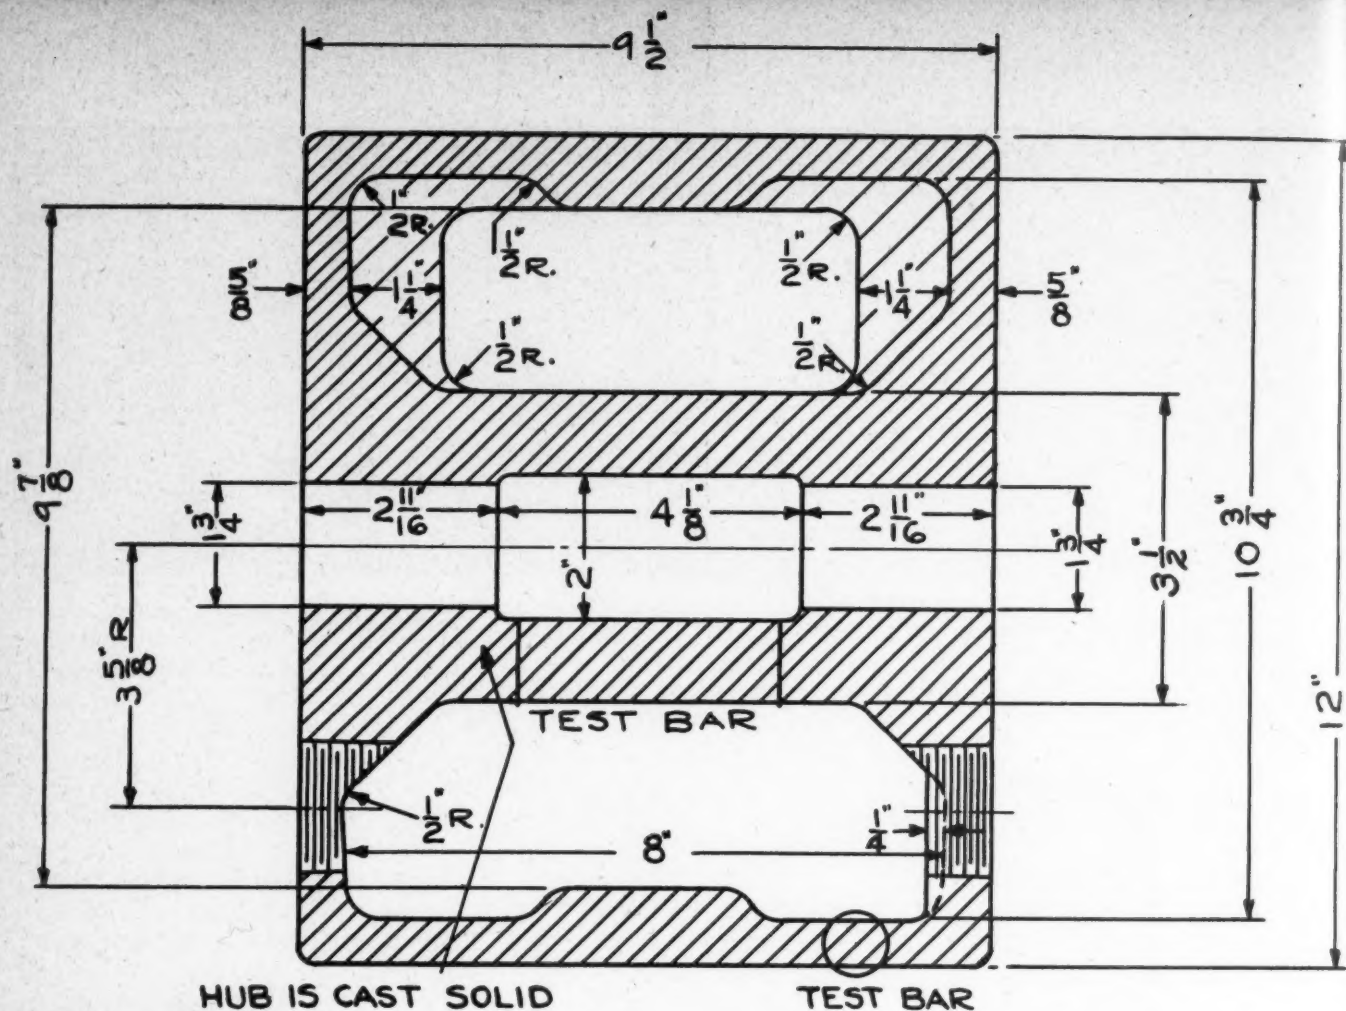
(above)—Cross-sectional drawing of air compressor piston.
